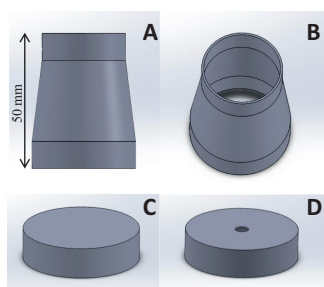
Schematic design of the bug pod using Solidworks. (A) side view; (B) perspective view; (C) bottom lid for loading the weevils; and (D) top lid with a 3-mm hole for *Rhinoncomimus latipes* to escape after aerial release.
